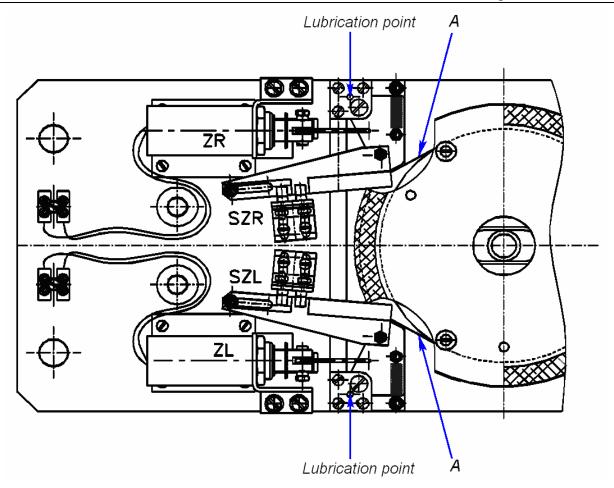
Above view of the operating mechanism installed inside the top channel (13) with lubrication points
